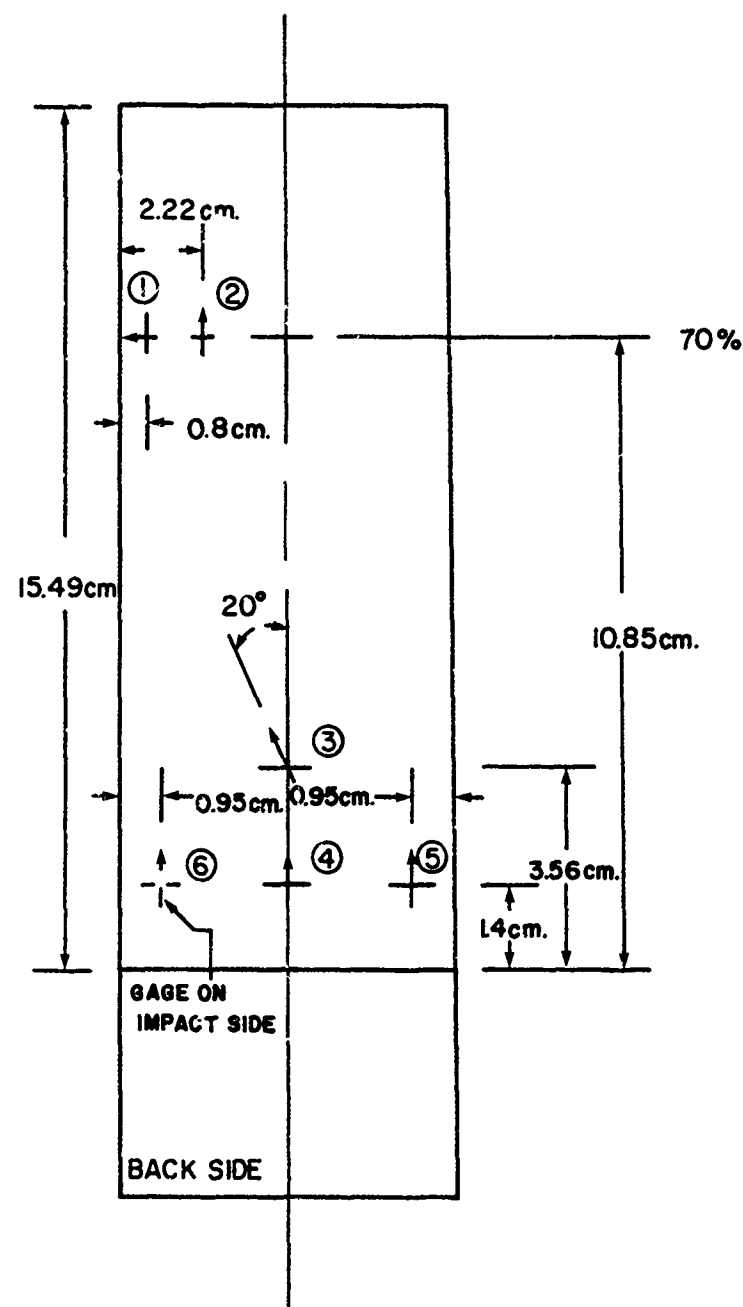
A. Strain Gage Locations for Group 18 and 19 Structural Element Test Specimens.
